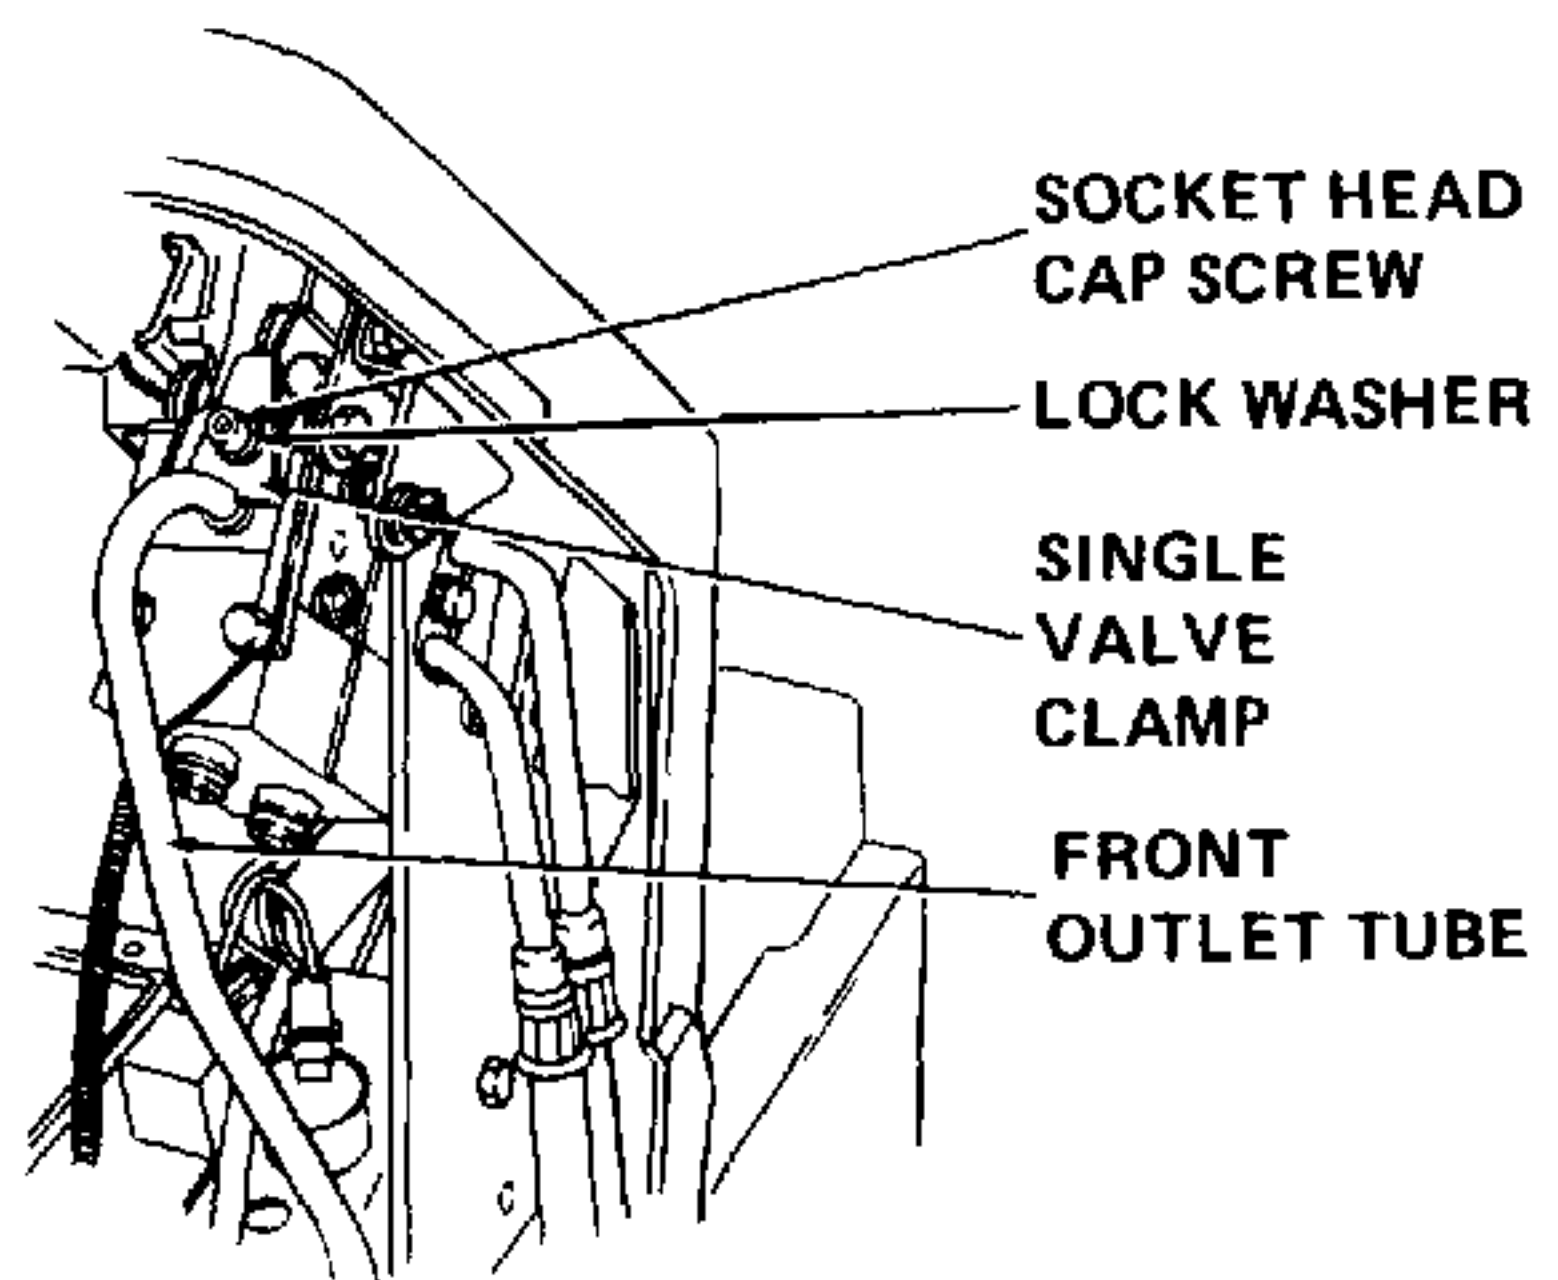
Installation of Front Outlet Tube (Models 1541, 1862, 1882 and 2082 Only).
